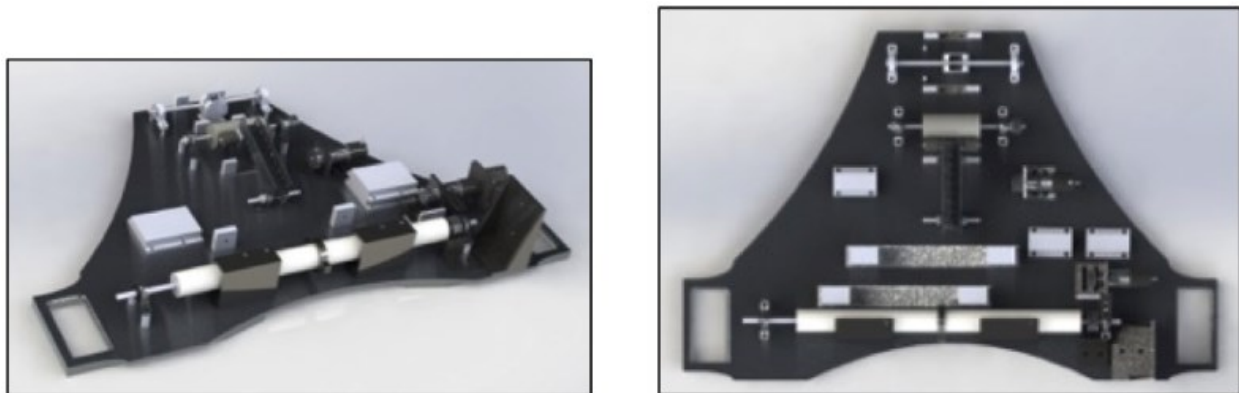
Prototype tensioner motor and spool mechanism
